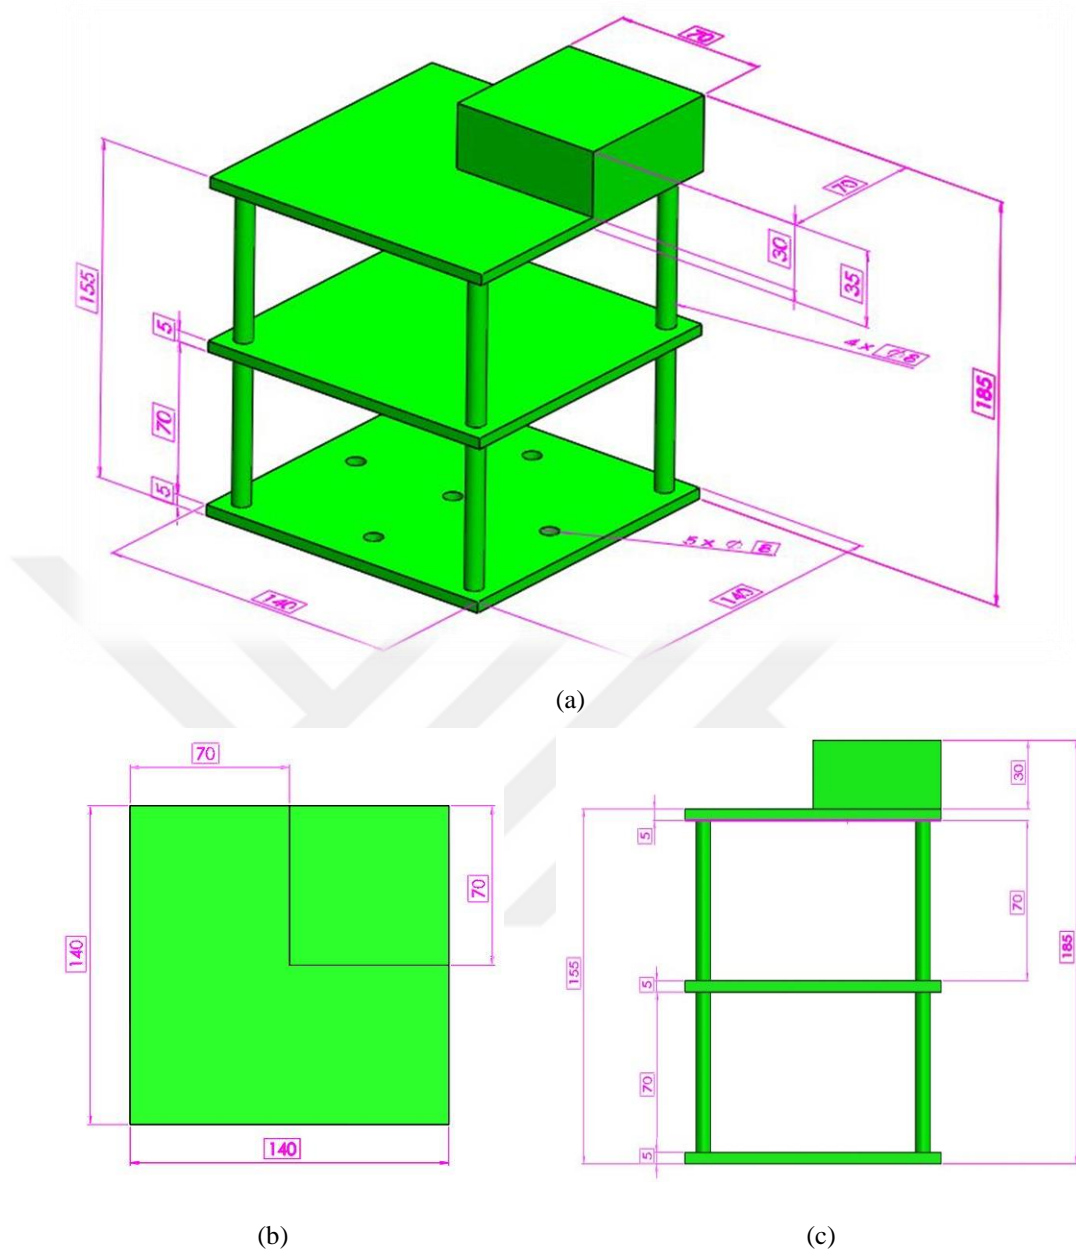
Geometrical properties: (a) perspective view; (b) top view; (c) side view
